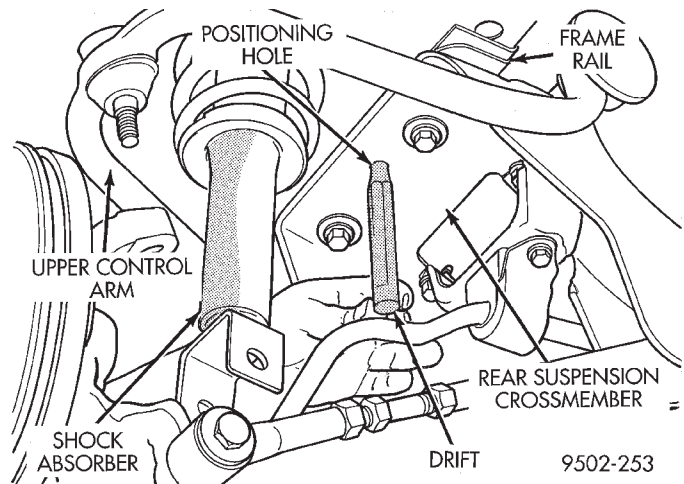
Locating Rear Suspension Crossmember In Vehicle
